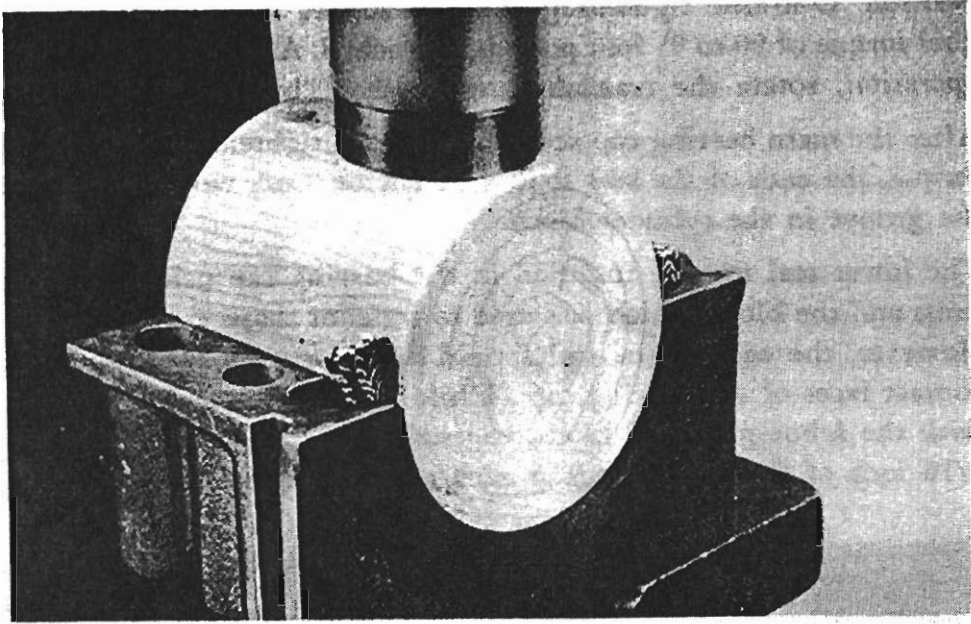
Pressing the Rear Main Bearing Oil Seal into the Bearing Cap Using an Arbor Press.
